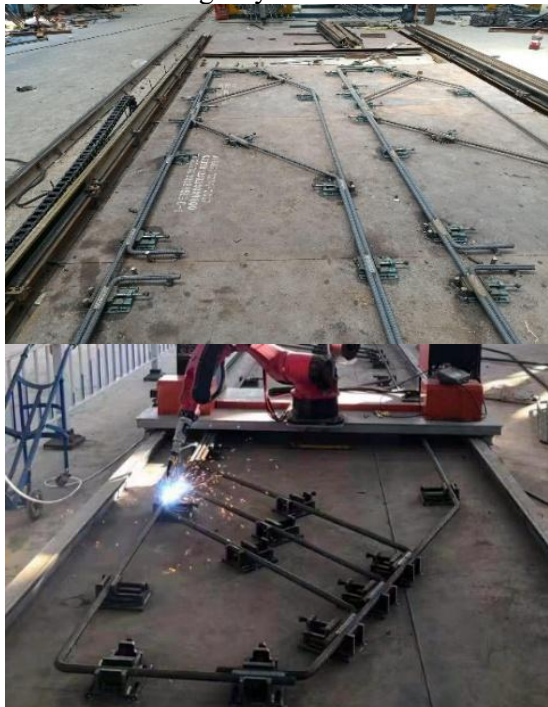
Operation of the Intelligent Welding Robot in Smart Beam Yard
